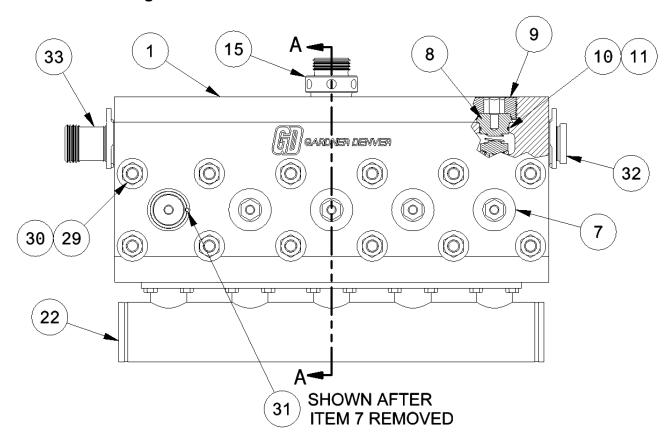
FLUID END ASSEMBLY 2.75" - 3" FRONT VIEW
